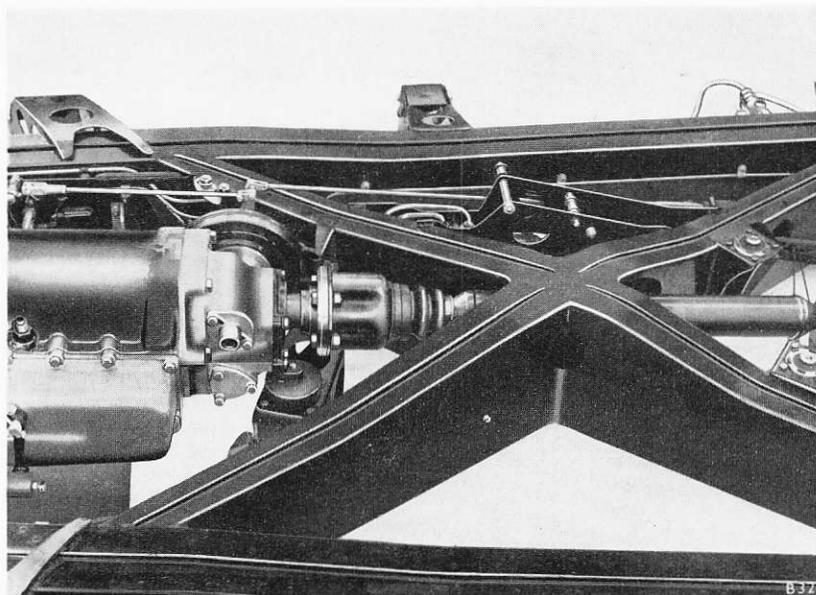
Front universal ball and trunnion joint (early S1 chassis)
